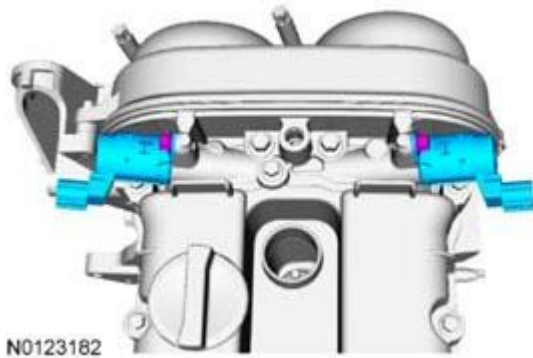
Identifying Variable Camshaft Timing (VCT) Oil Control Solenoids And Bolts
